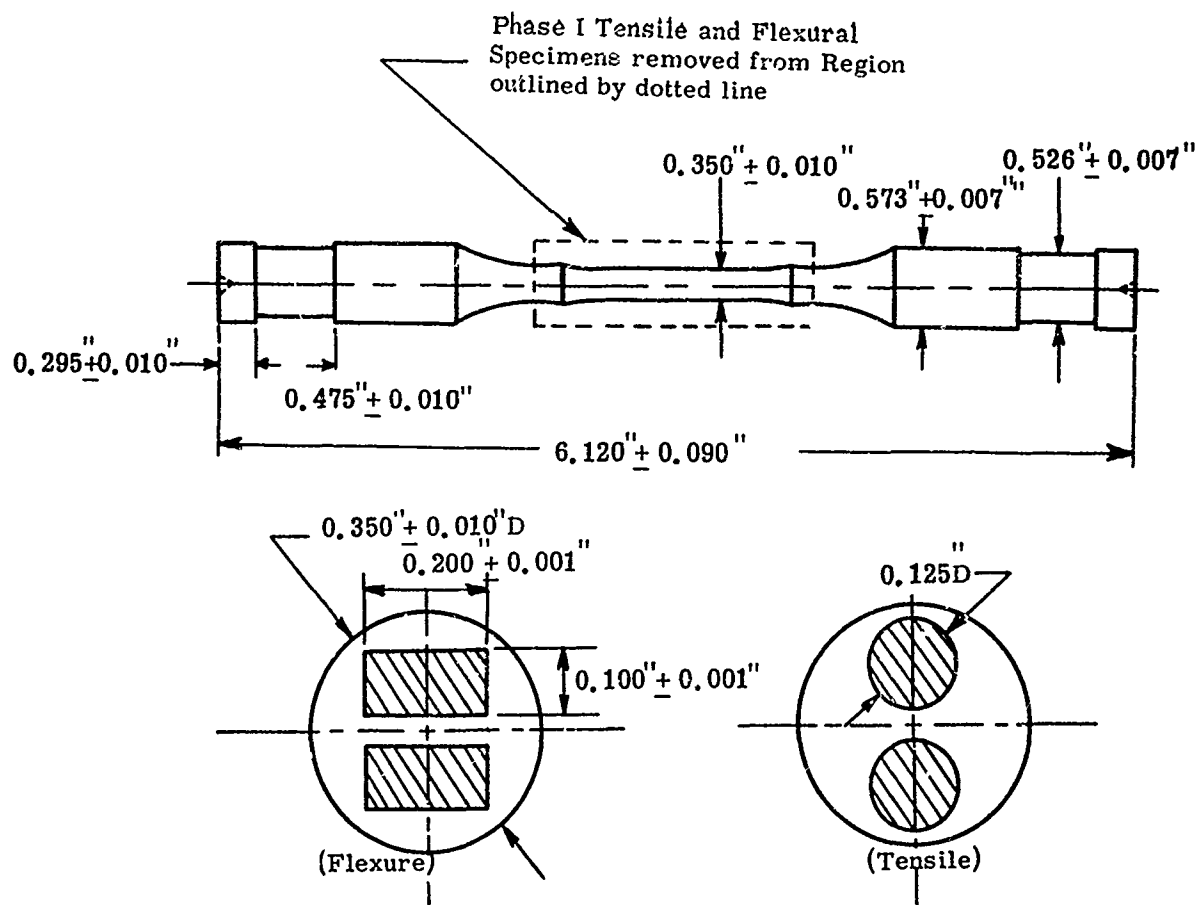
Configuration of Specimen Blank 1831-A-2 as received from Coors and Cutting Plan for Removing Phase I Macro Tensile and Macro Flexural Specimens
